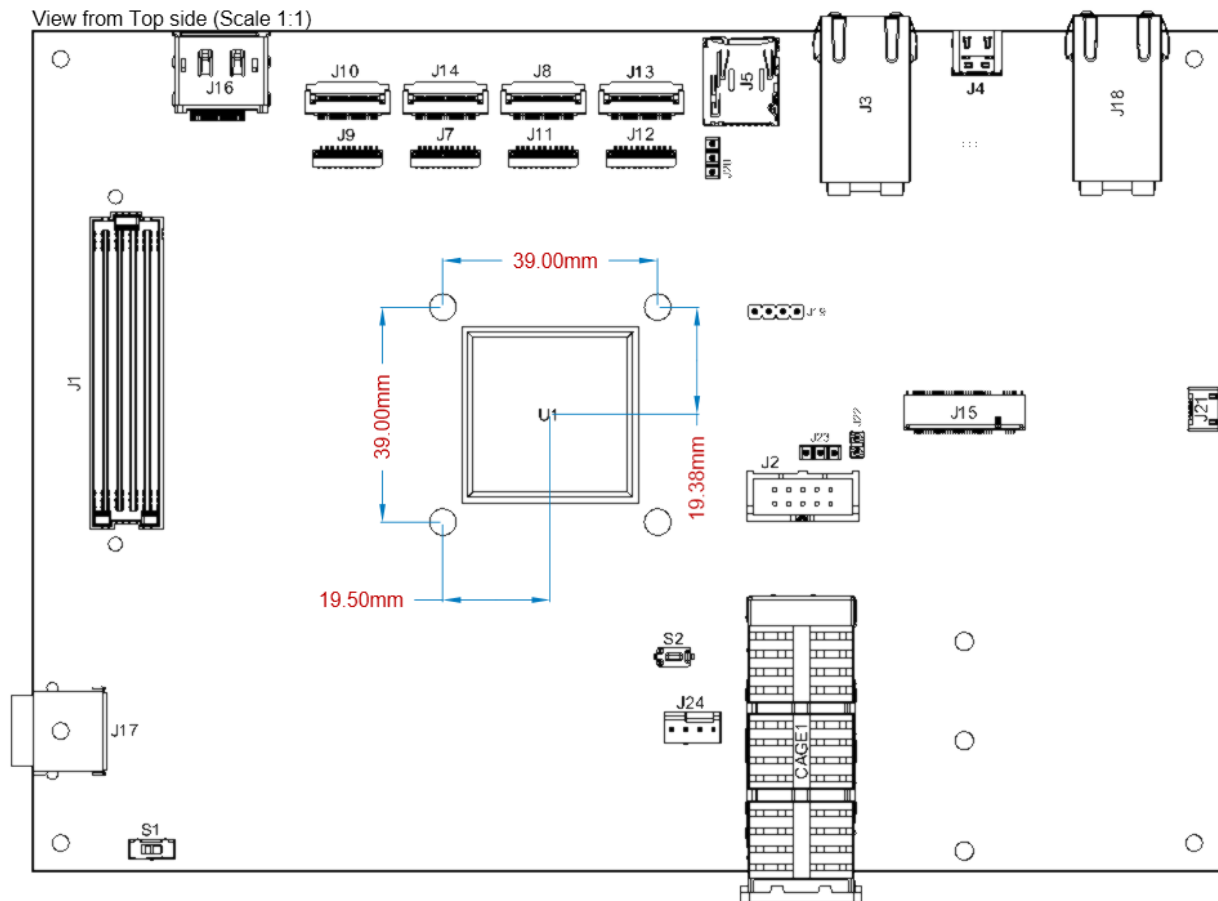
1/-2 "Old" Heatsink Mounting Hole Dimensions
